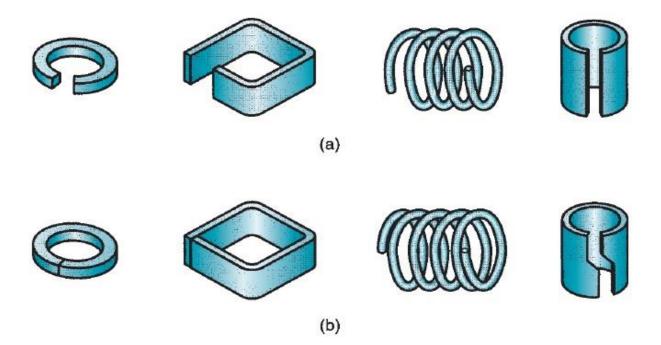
(a) Parts that tend to tangle and (b) parts designed to avoid tangling.
